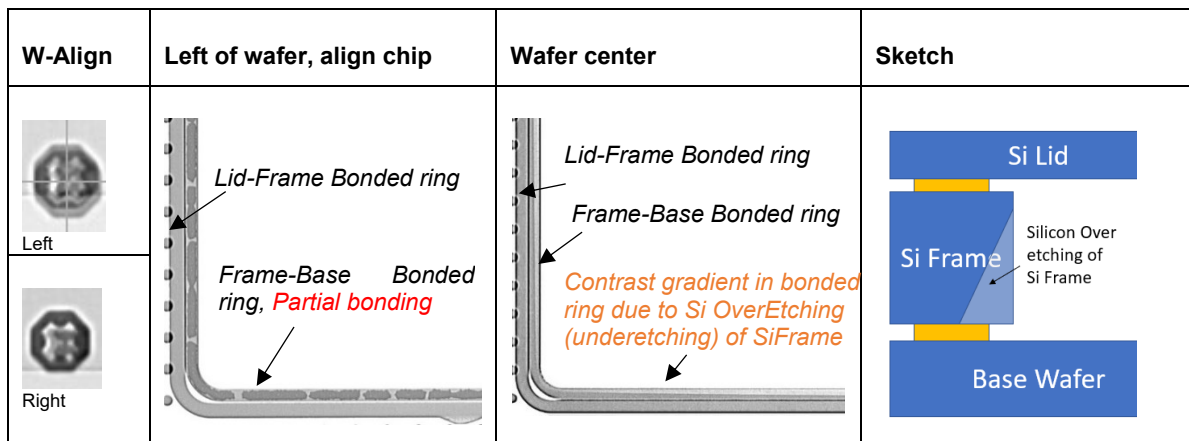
X-Ray inspection (example) after bonding of HybridCap#02 on base wafer. Picture Left: ChipAlign Left & Picture Right: Wafer center
